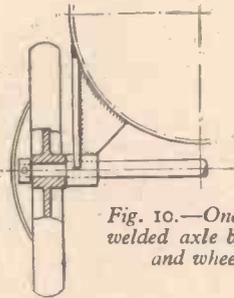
One of the welded axle brackets and wheels.
